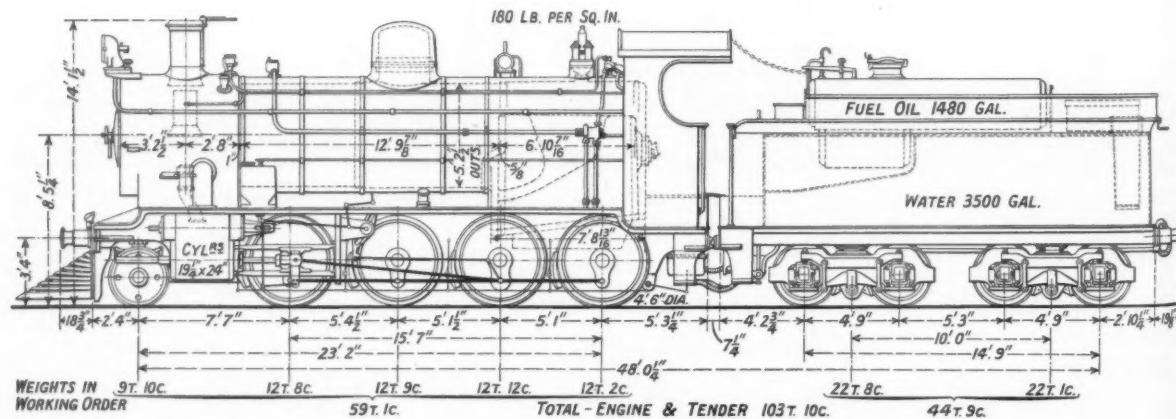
Drawing showing overall dimensions and distributed weights of locomotive as now arranged
